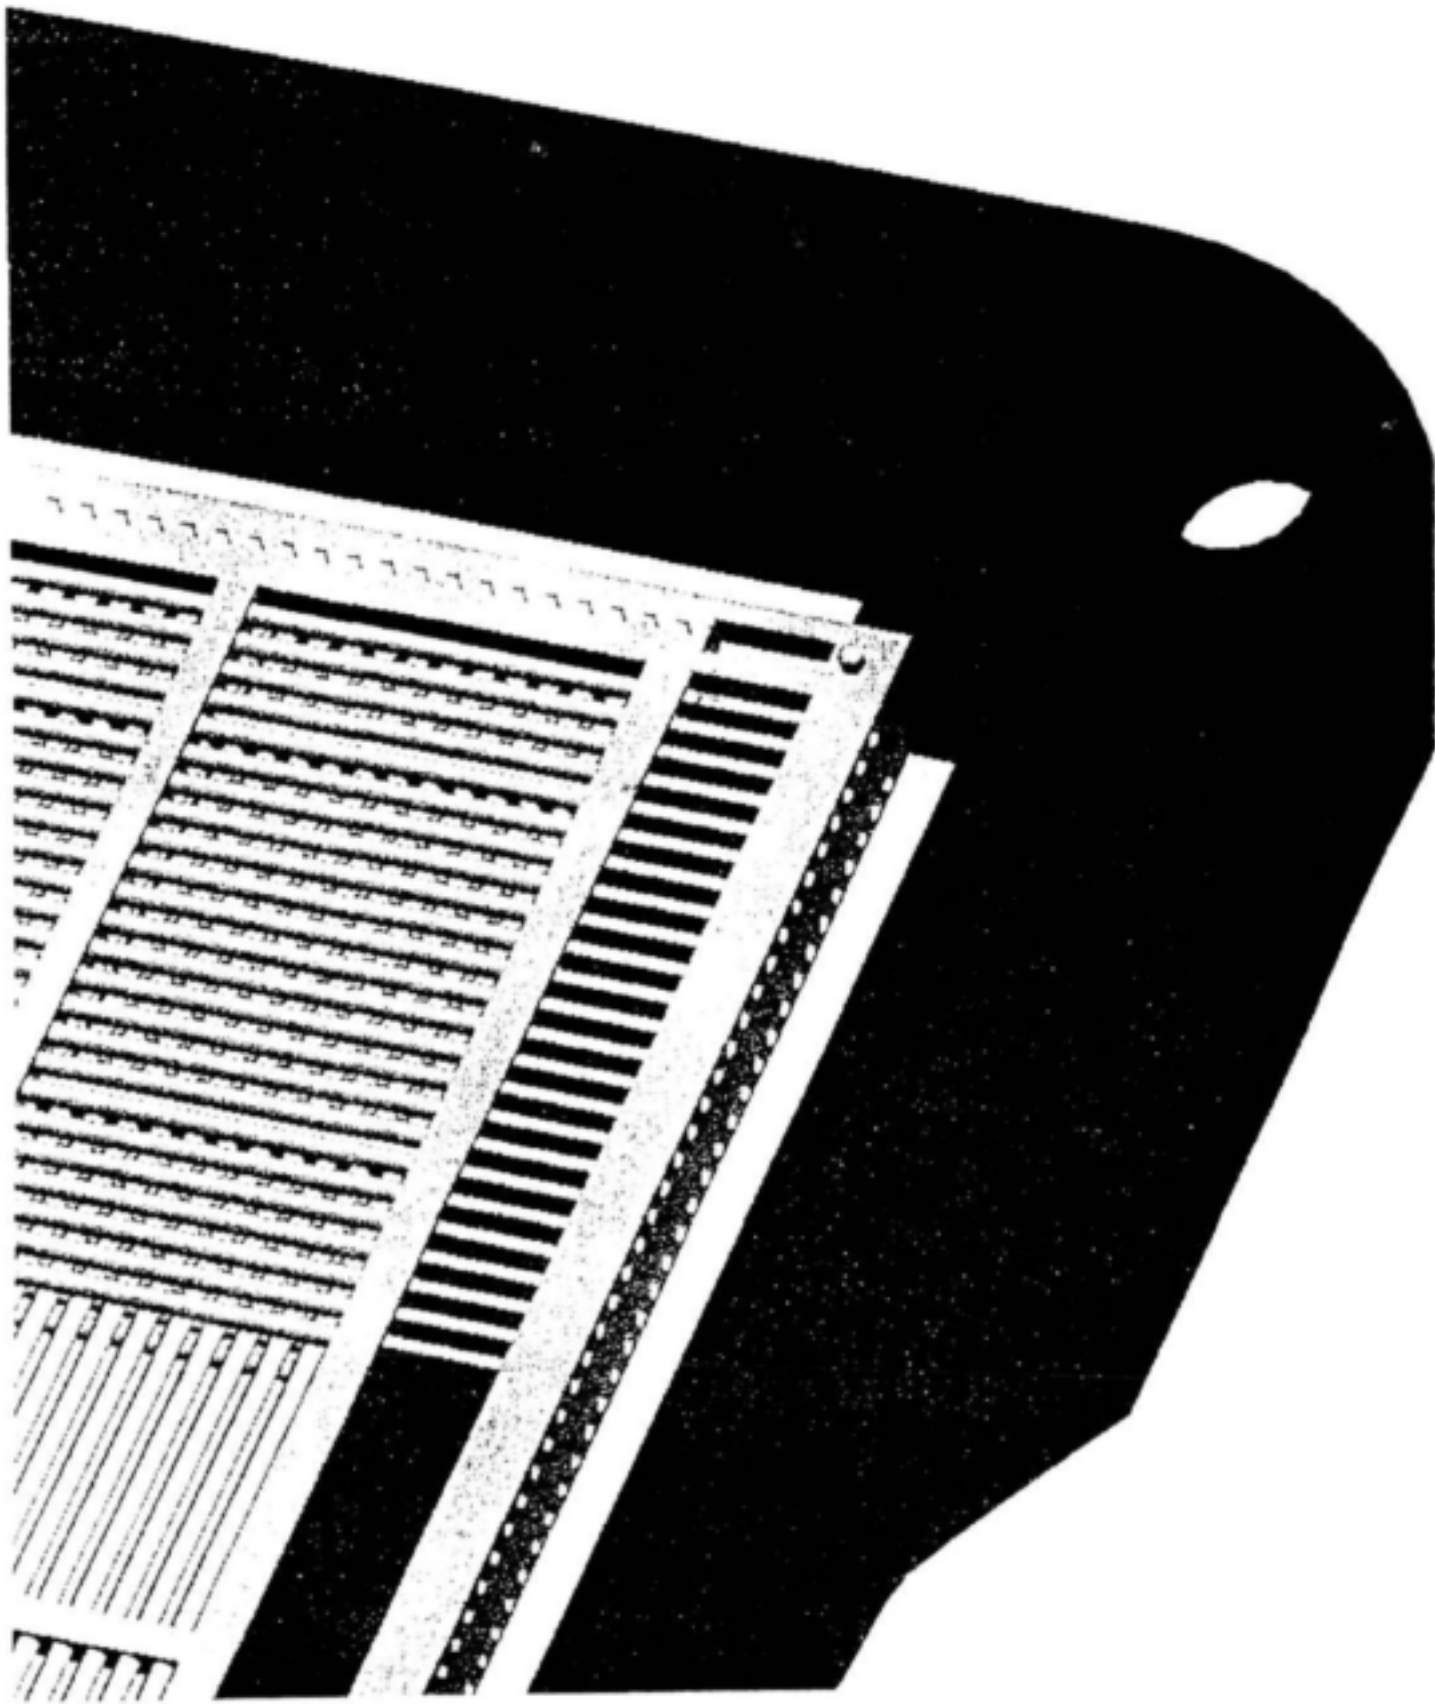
3-DIMENSIONAL DETAIL DWG ILLUSTRATING THE SIMPLIFIED MODULE ASSEMBLY METHOD
